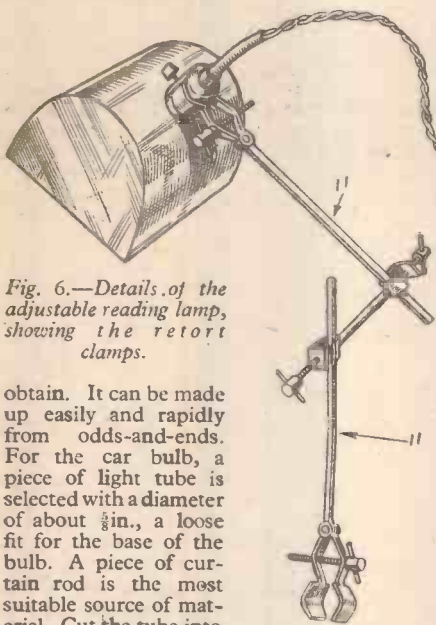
Details of the adjustable reading lamp, showing the retort clamps.
